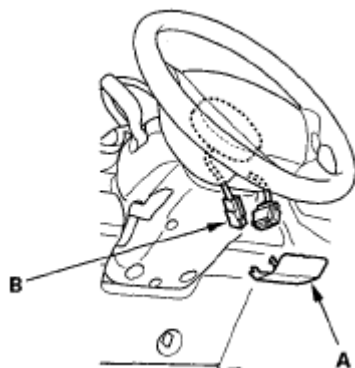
Identifying Access Panel And Driver's Airbag 4P Connector
